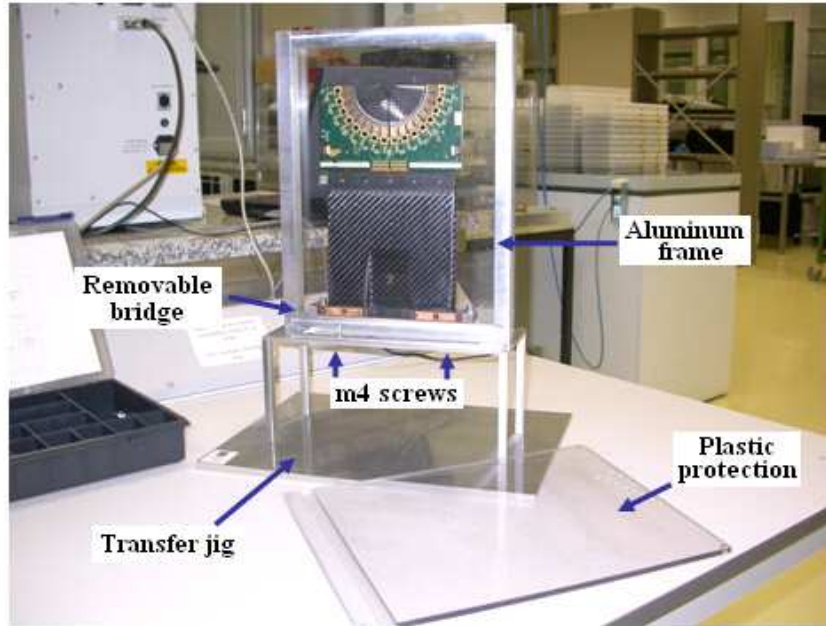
An LHCb VELO Module mounted in the mechanical frame on the transfer jig.
